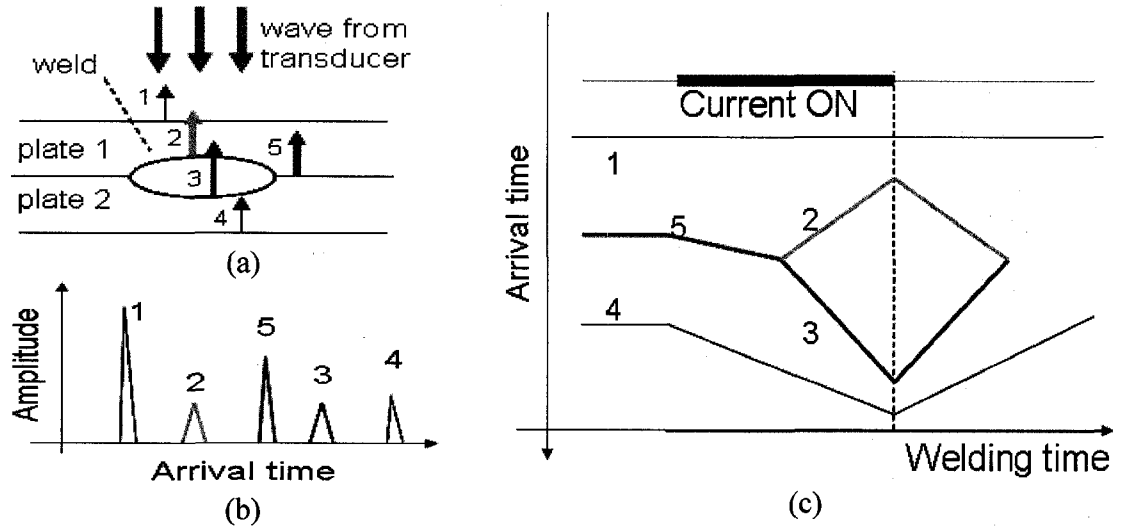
Formation of the weld signature. (a) reflecting interfaces of the spot weld; (b) A-scan of weldment reflections; (c) B-scan (combination of A-scans).
